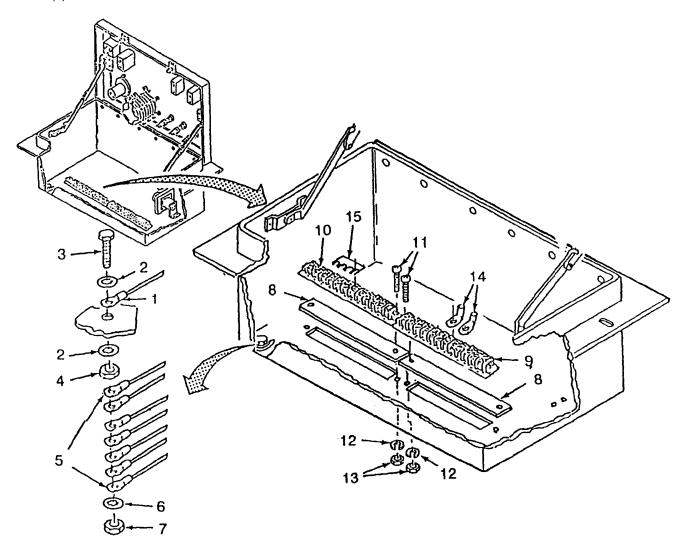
Control Box Assembly Terminal Boards/Transformer (Sheet 1 of 3)
